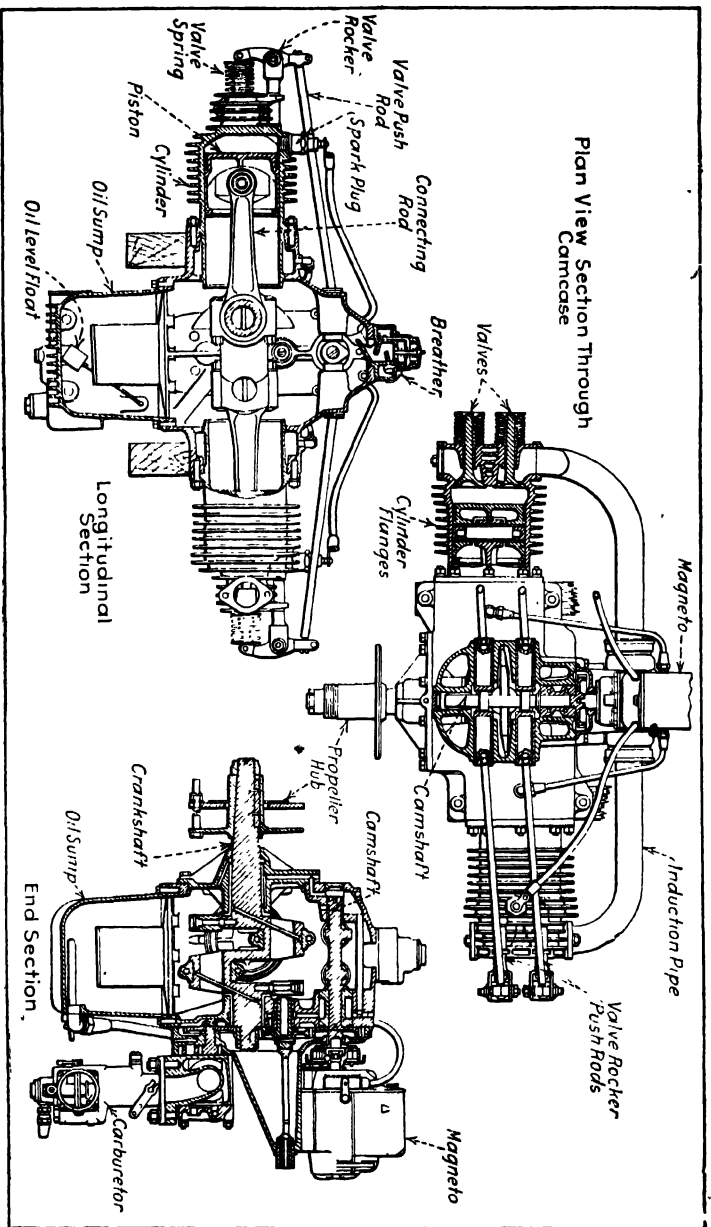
Sectional Drawing Showing Construction of Wright-Morehouse Aviation Engines with All Important Parts Designated for Easy Reference. These Engines Are Now Known as the Lincoln Rocket.
